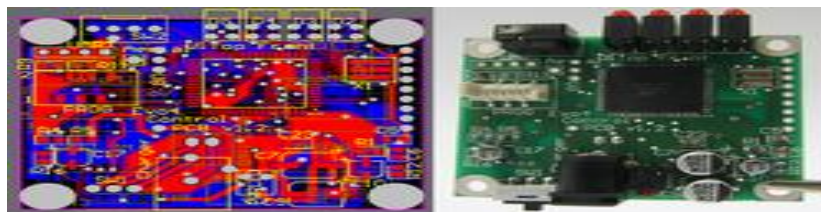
Double- sided PCB design (left) and board assembly (right) on a computer [37].
